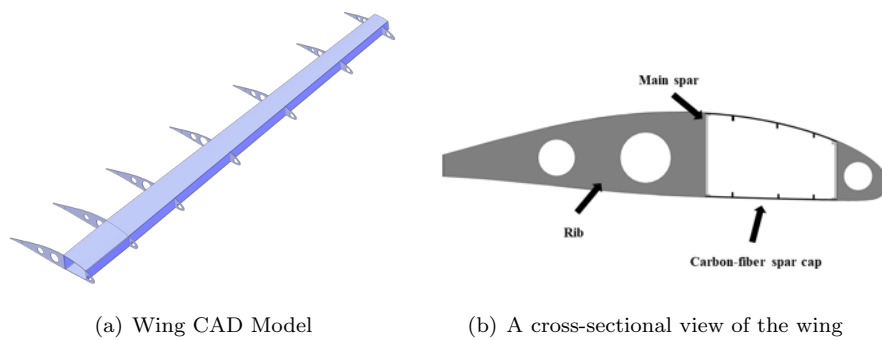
Wing CAD model and description of different locations on the wing cross-section
